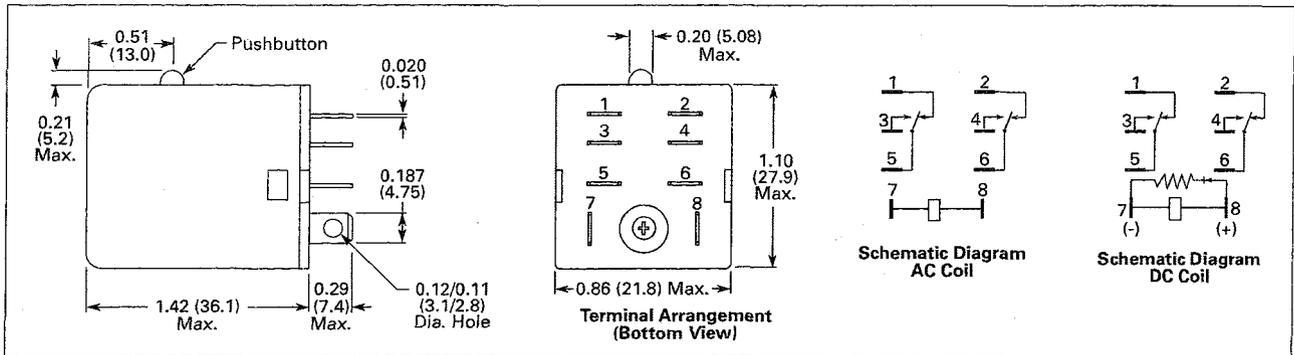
D7PR23 — Approximate Dimensions in Inches (mm)
